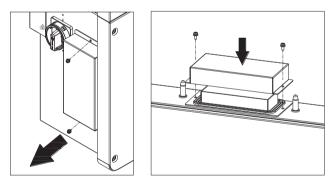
Install the Cover Board on the Connector of the Wiring Box
